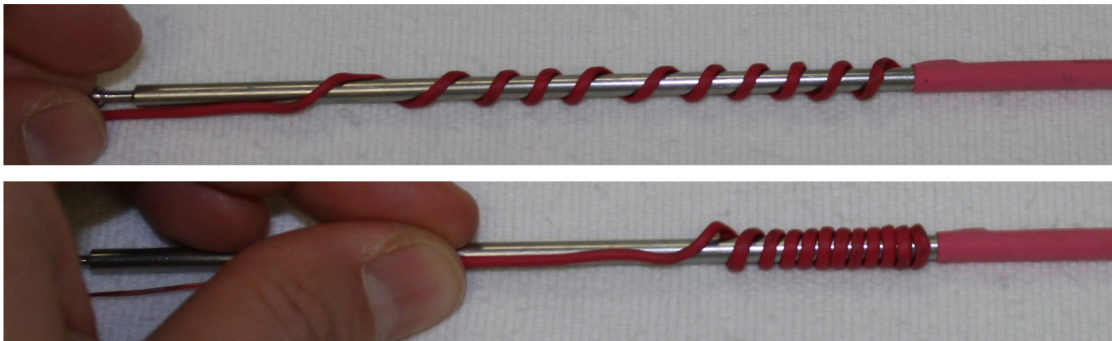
Cable wiring to allow the inner shaft to slide inside the middle shaft in order to accommodate the different tips.
